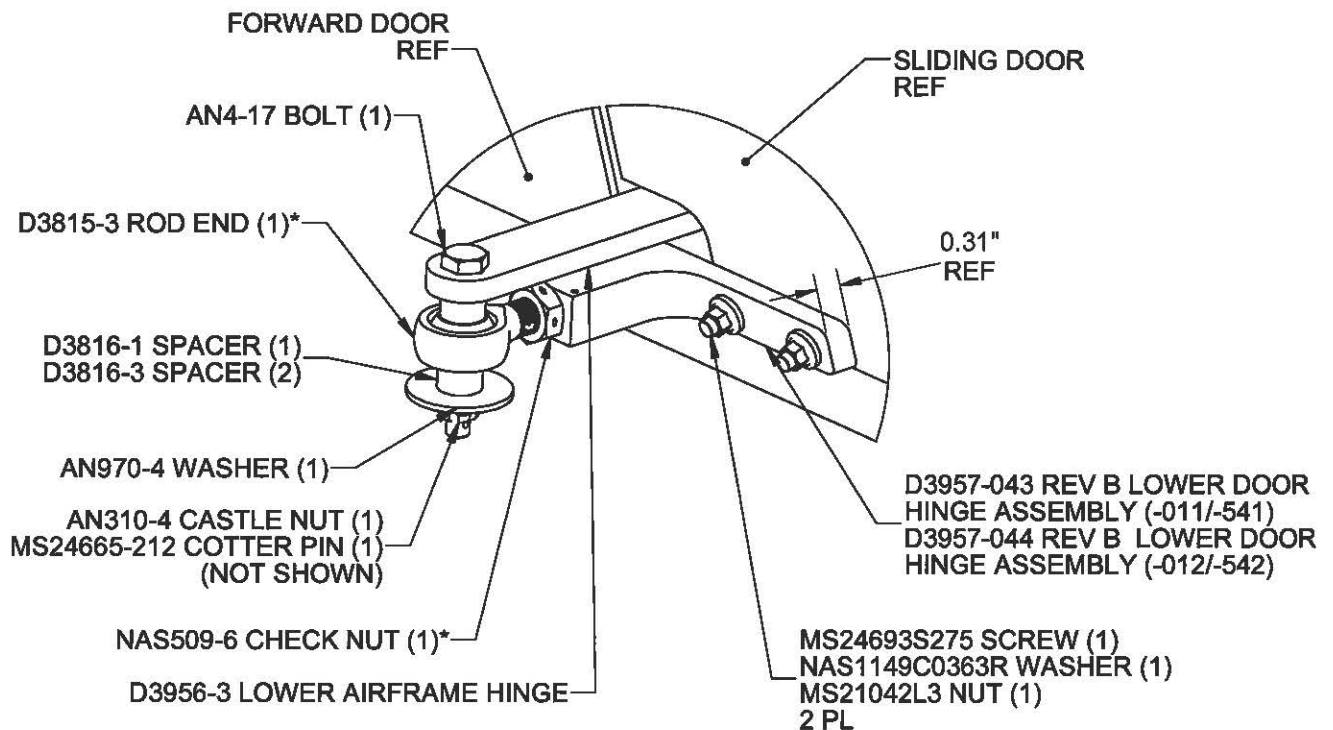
LOWER HINGE ASSEMBLY (-541/-542 CHG 001)
